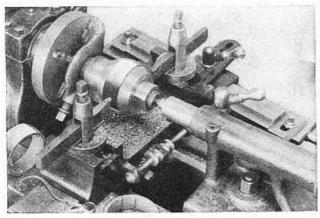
Crowning Pulleys with Taper Attachment on 18-inch Lathe
